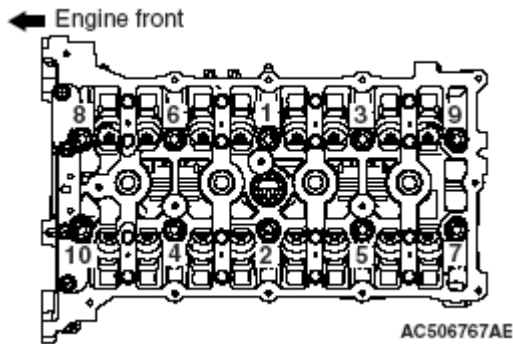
Identifying Cylinder Head Bolts Numerical Order
